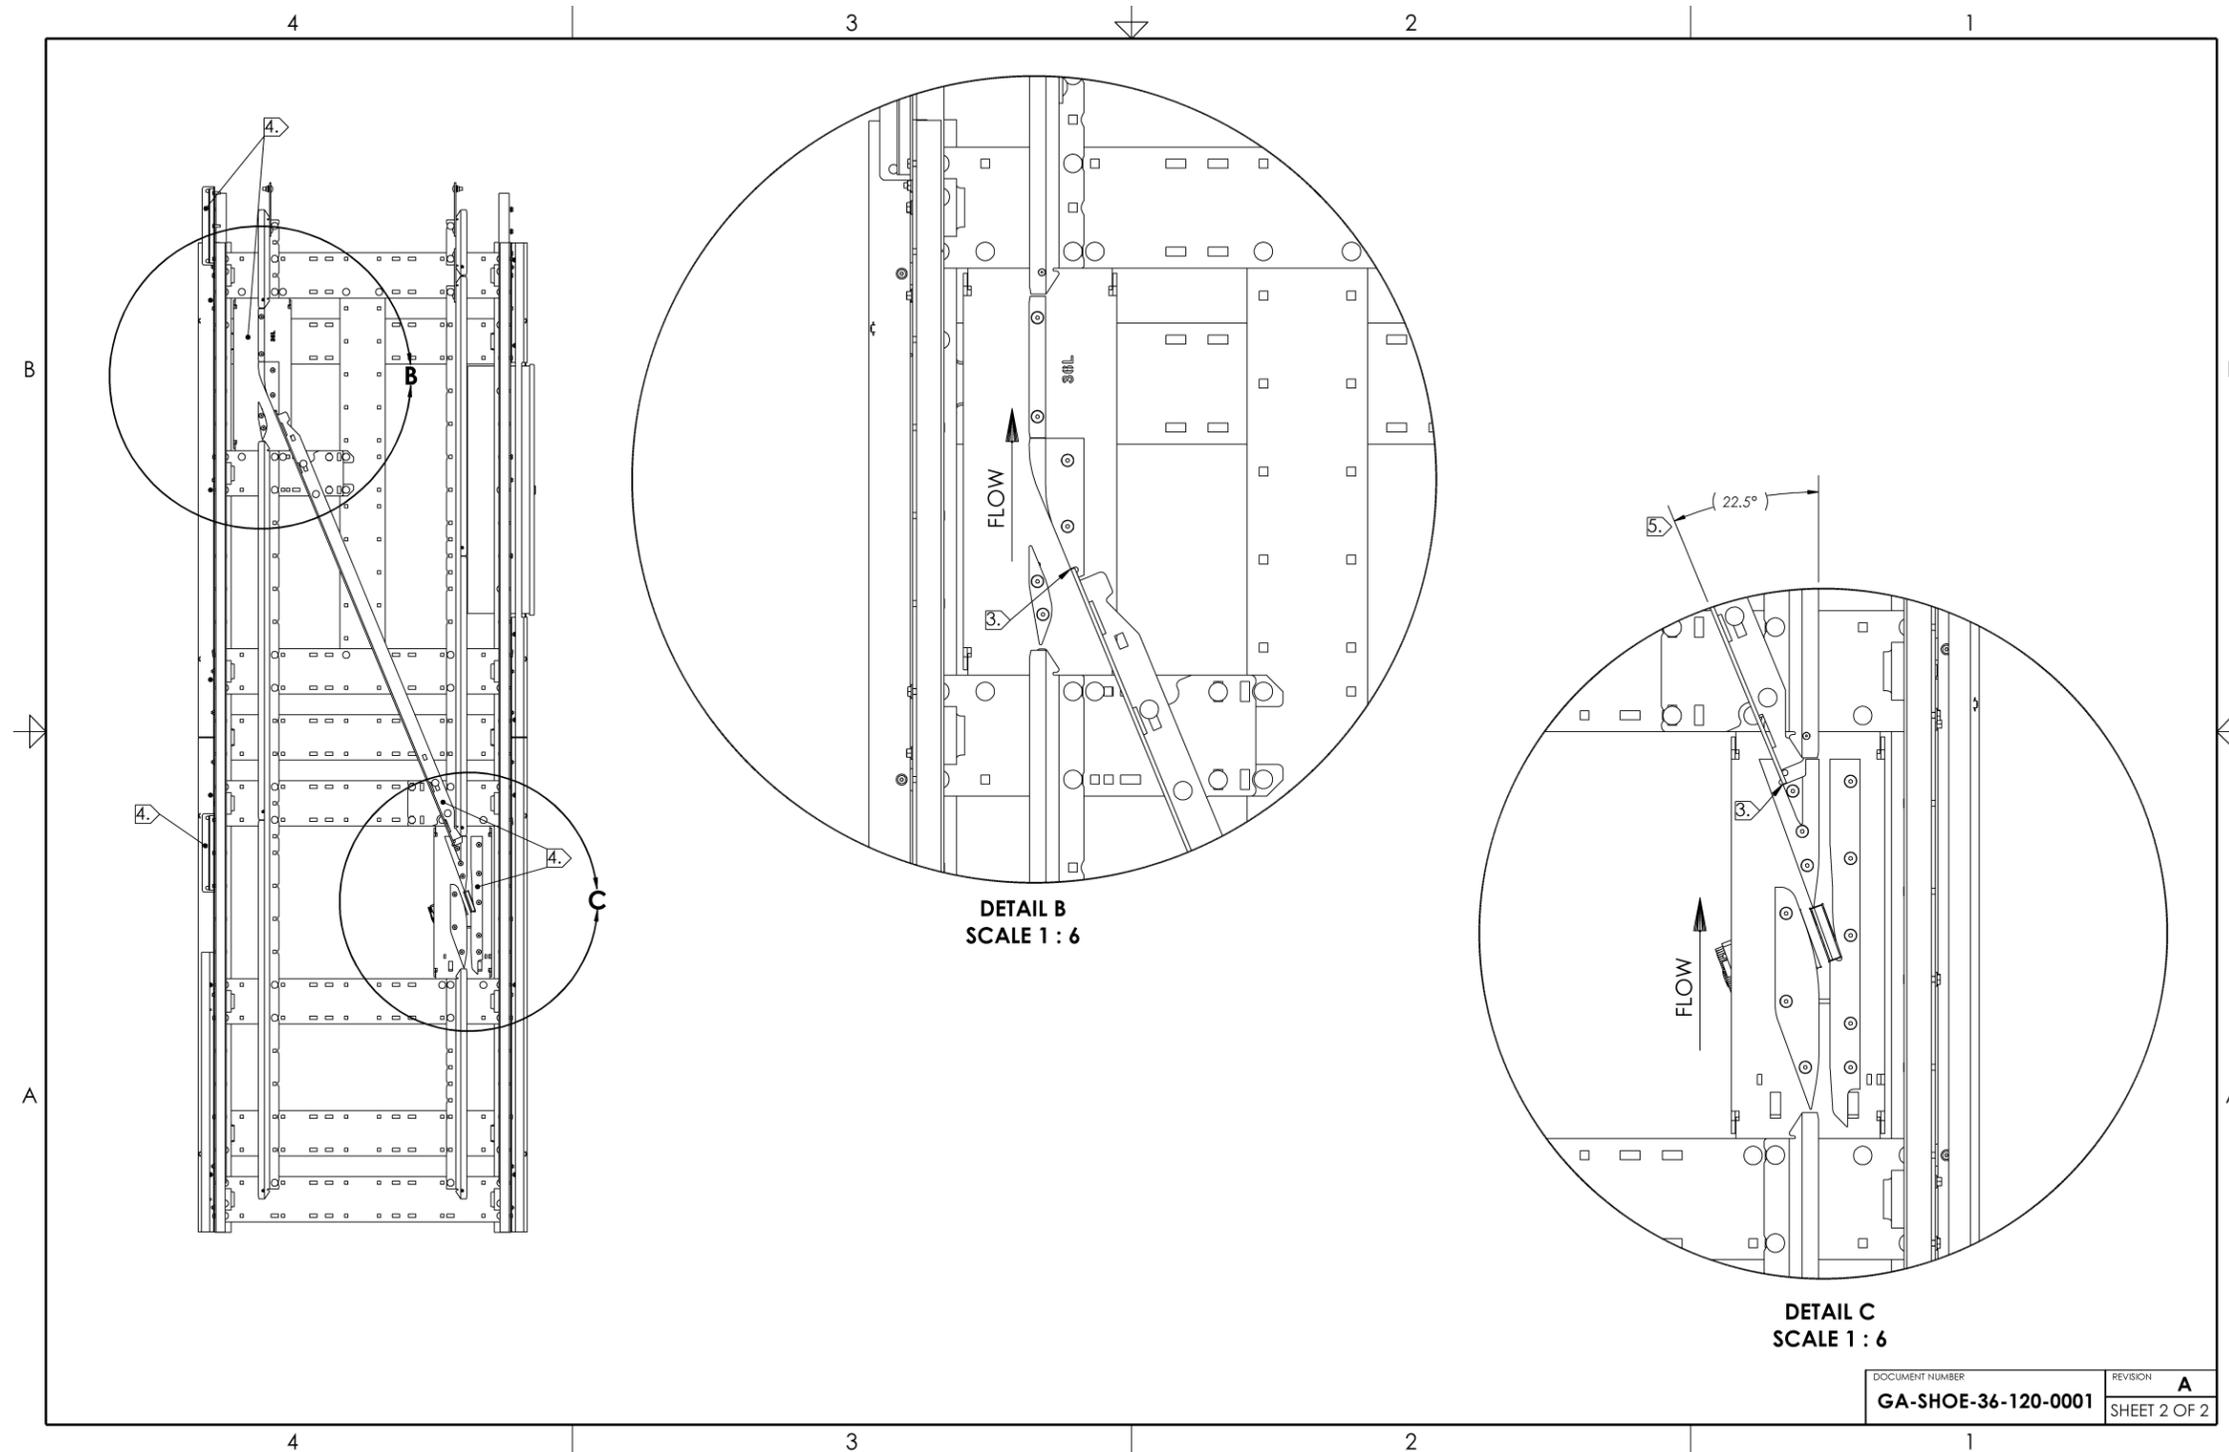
General Arrangement, Shoe Sorter Divert Section, Sheet 2 of 2
